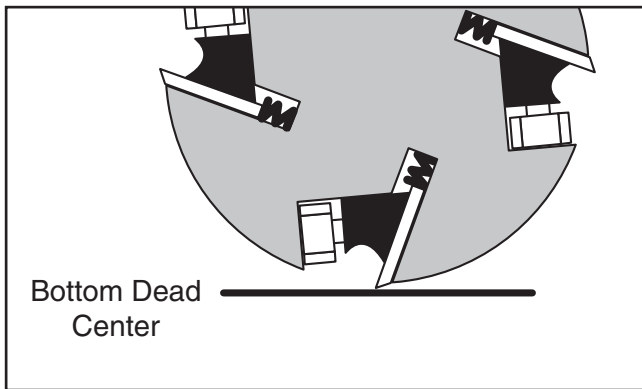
Cutter edge at bottom dead center (same concept with carbide inserts).
